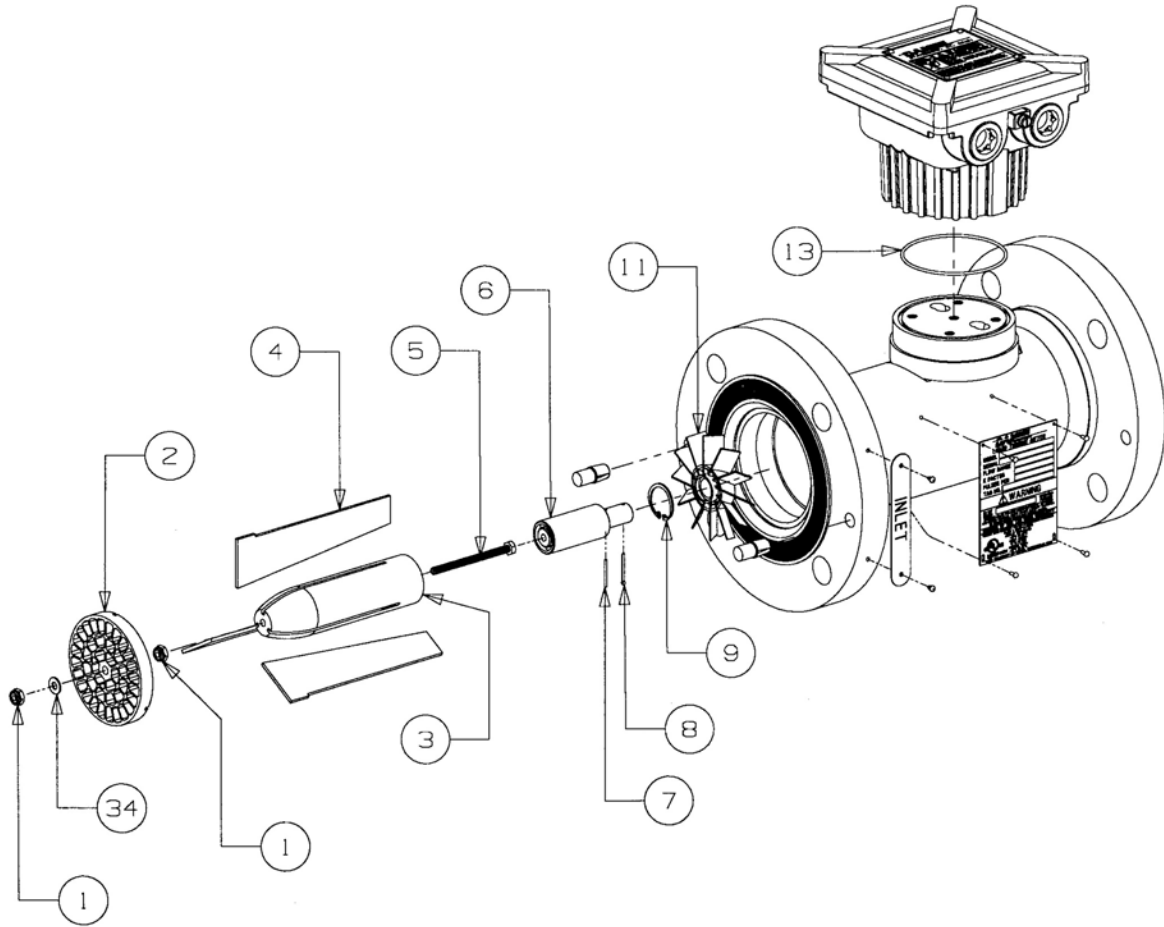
Meter Assembly (3" and 4") - Turcite Bearing Internals (Reference Table 7-2)
